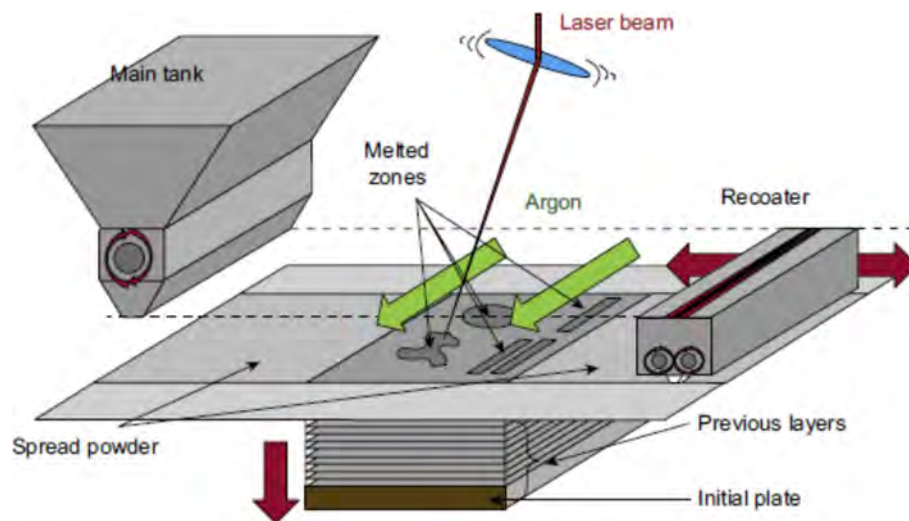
Schematic of the build chamber of a selective laser melting machine, showing the laser beam, build plate, powder recoater, and flow of inert gas. This example uses a hopper to deposit powder (top left), similar to the design of the micro-SLM.
